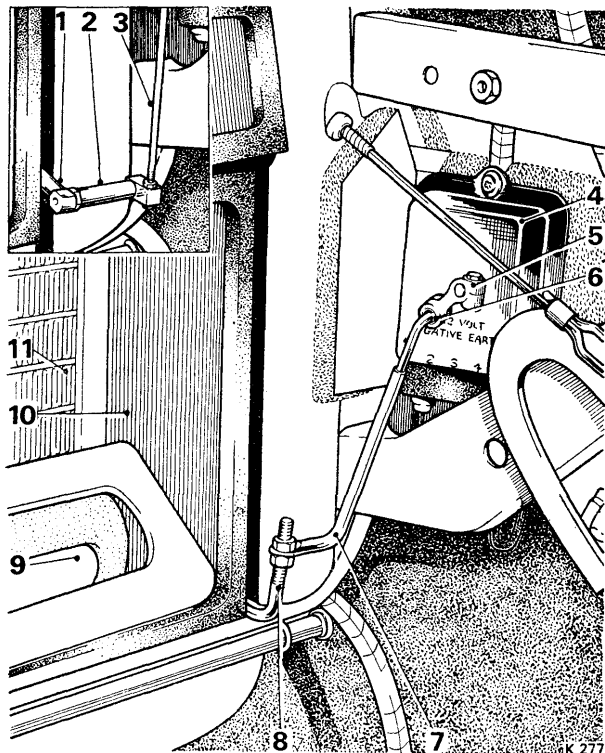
LOWER TEMPERATURE FLAP ACTUATOR SETTING
